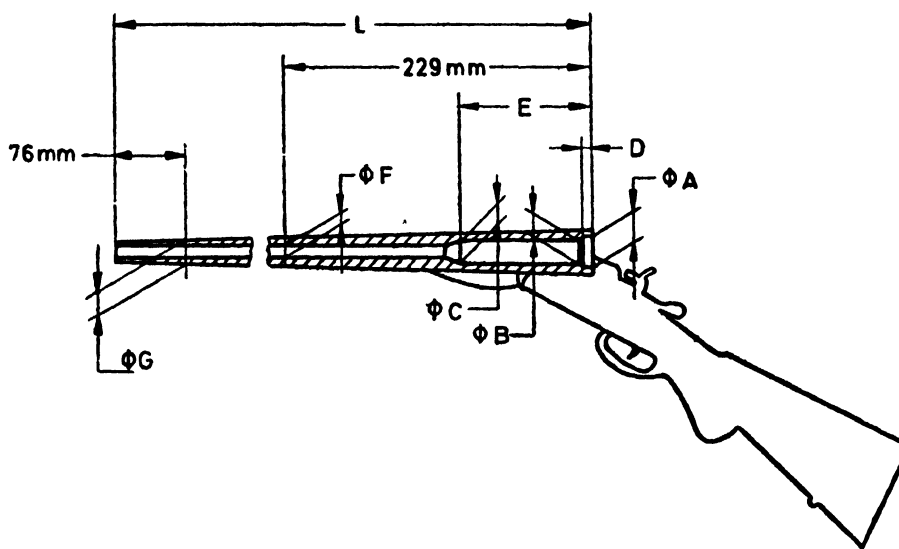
DIMENSIONS FOR BREECH LODING SHOT GUN
